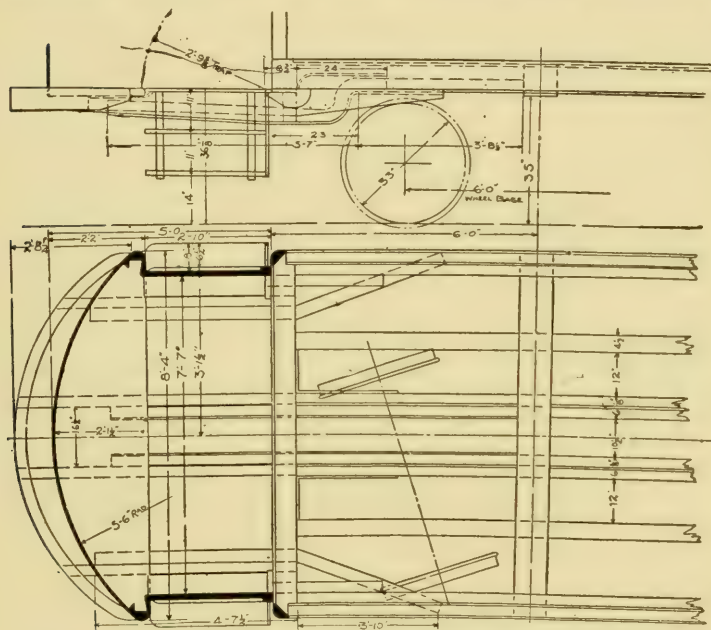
General Sketch of "Standard" Vestibule, Showing Method of Attachment to Car Body.
